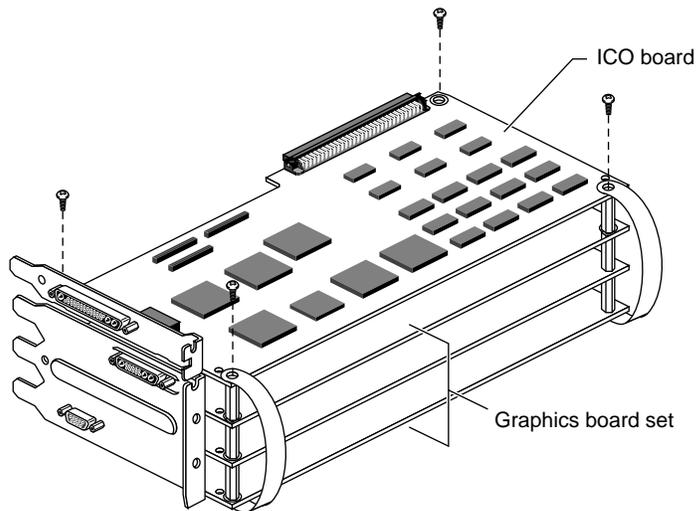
Aligning and Attaching the ICO Board to the Graphics Board Set
